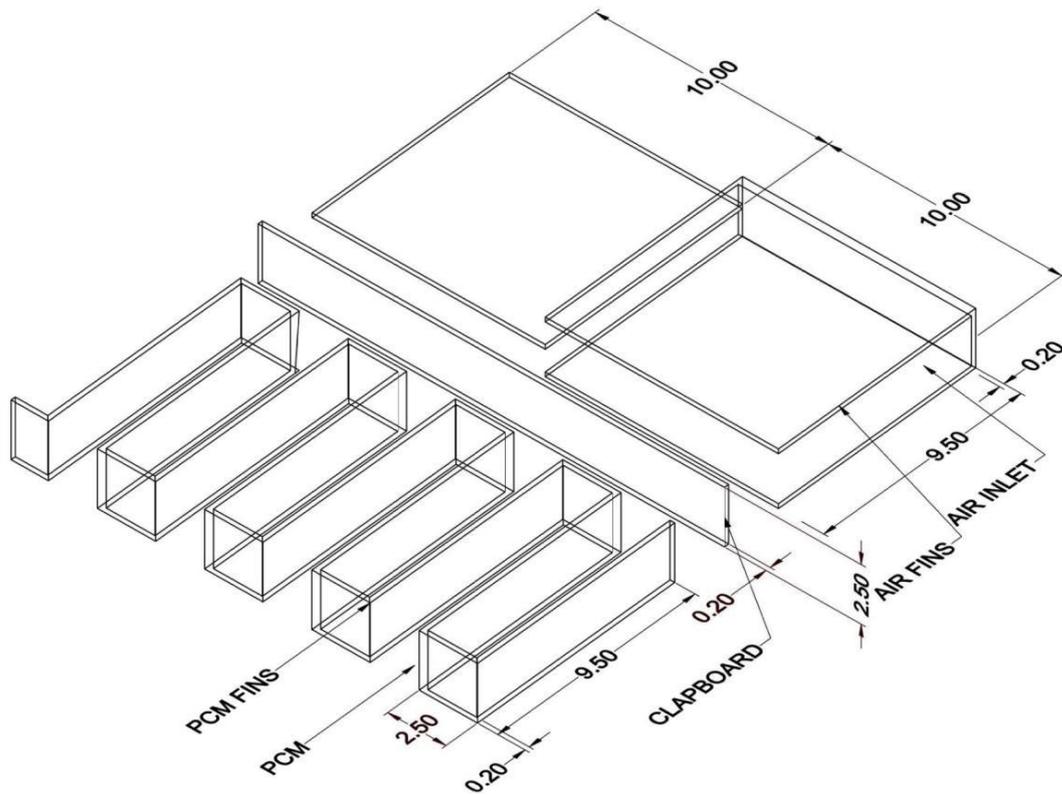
Geometrical dimensions of the fins and clapboards.
